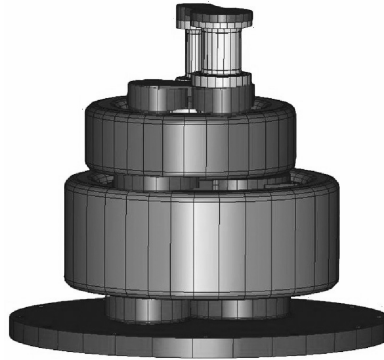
Lockheed Martin 10K pulse tube cold end design.
